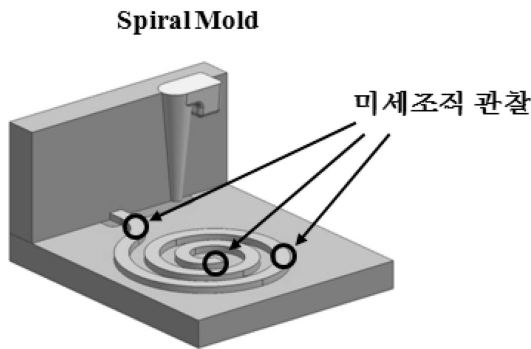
The schematic diagram of spiral mold for the fluidity test.
